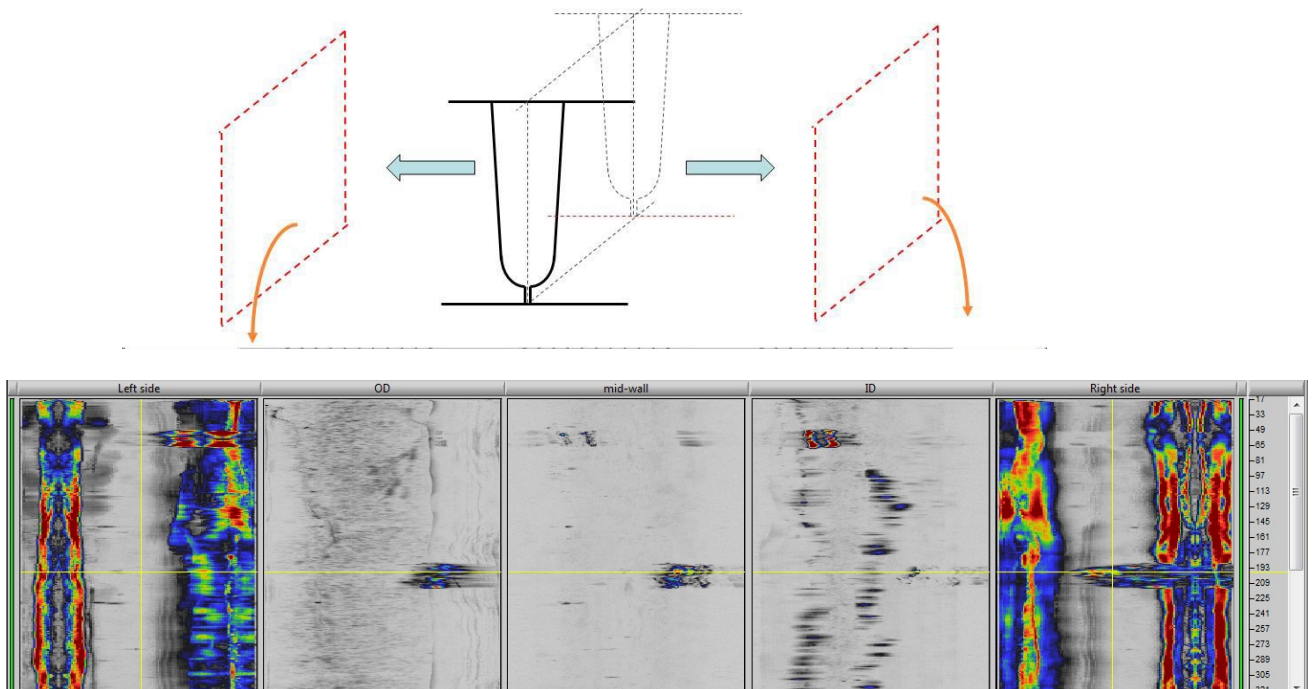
D-scan views of the seamweld from the left side and the right side.
